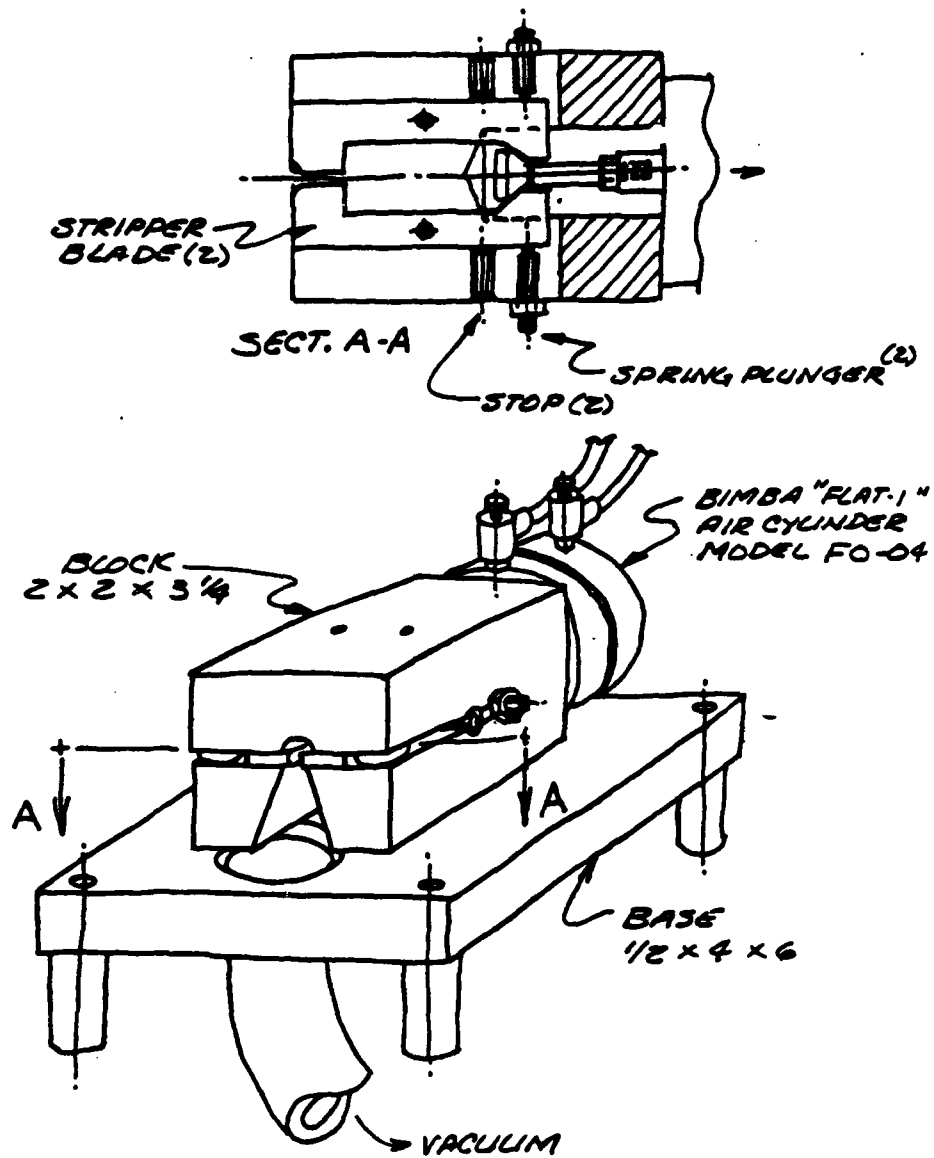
Tooling Concepts (Spindmotor Assembly Cell)
